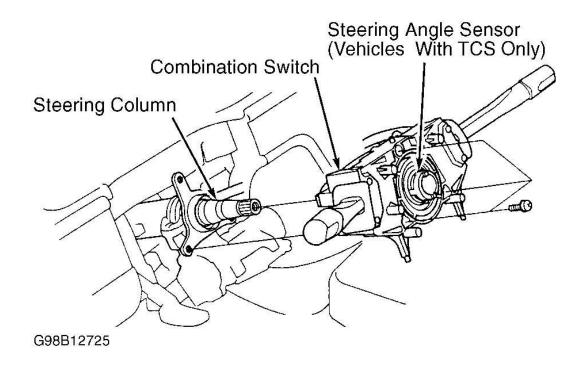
Removing Combination Switch Courtesy of AMERICAN HONDA MOTOR CO., INC.
